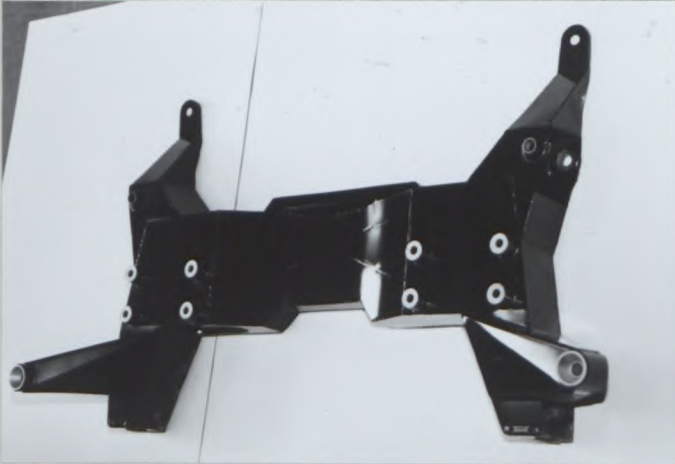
(RADIUS ROD ANCHORAGE POINTS)
